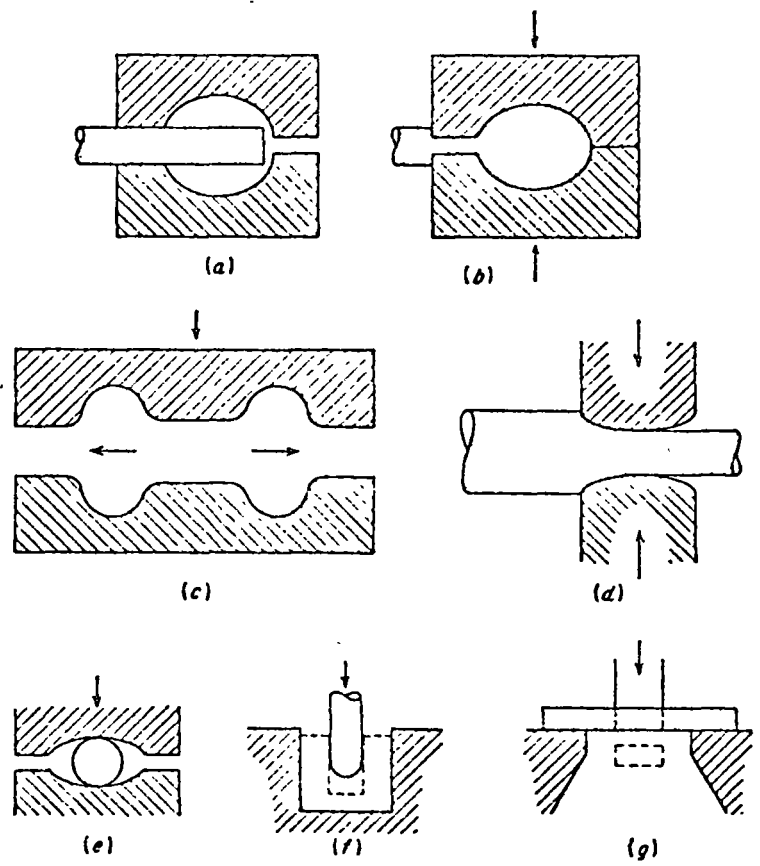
Forging operations. (a, b) Edging; (c) fullering; (d) drawing; (e) swaging; (f) piercing; (g) punching.
